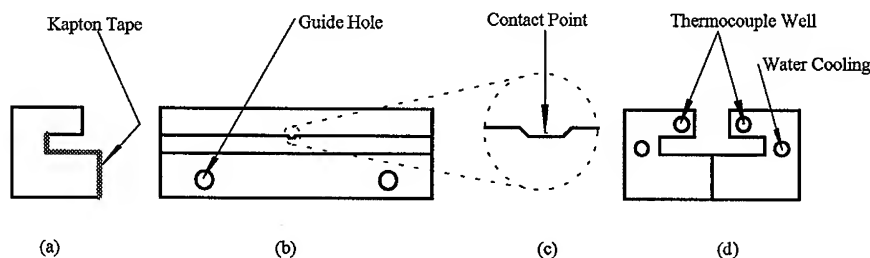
Illustrations of the copper block. (a) side view showing insulated area; (b) side view looking into the channel showing guide holes and contact point; (c) enlargement of the contact point; and (d) both blocks assembled showing thermocouple wells and water cooling holes.
